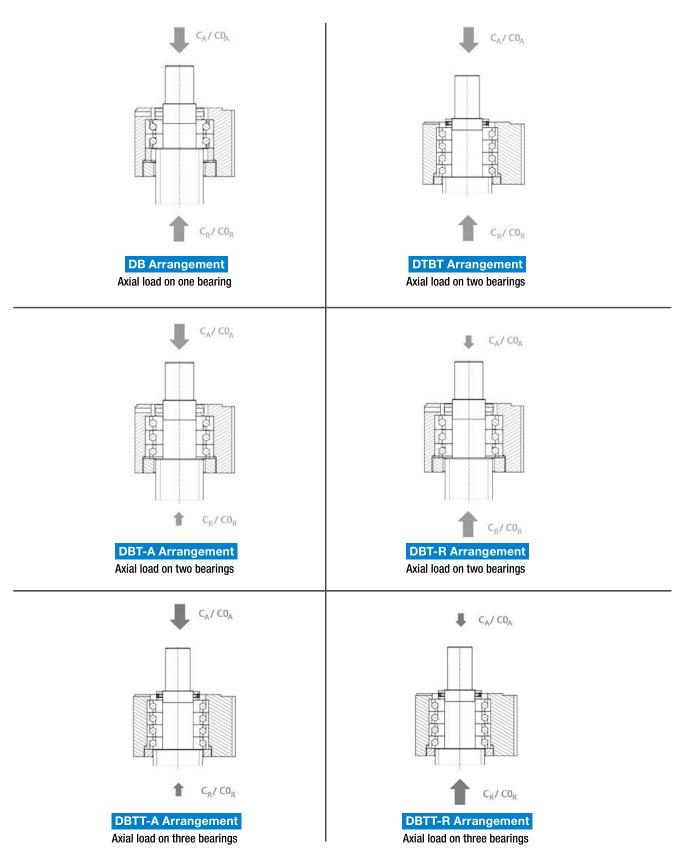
Bearing arrangement in fixed bearing units BSTK
